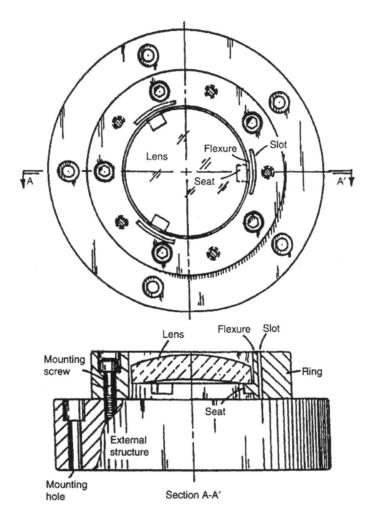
Top and side views of a flexure mounting using flexures of the type shown in Fig. 3.47(a). (Adapted from Bruning et al.²⁷)
